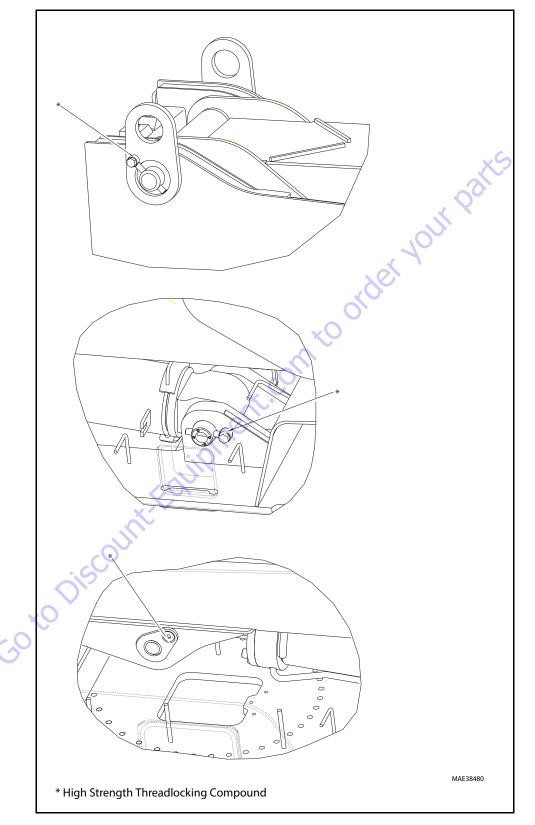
Locations for JLG Threadlocker Application - Sheet 4 of 5
